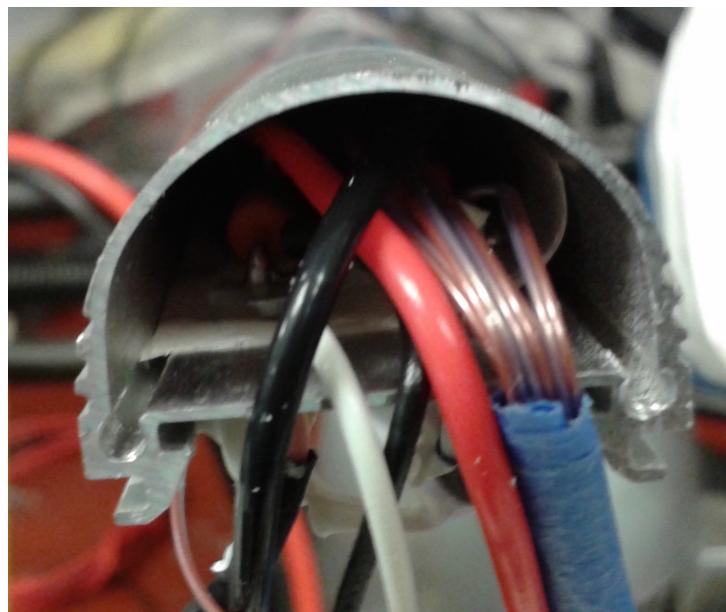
LED Driver Thermal Unit Fitted Inside a T8 Tube Housing.
